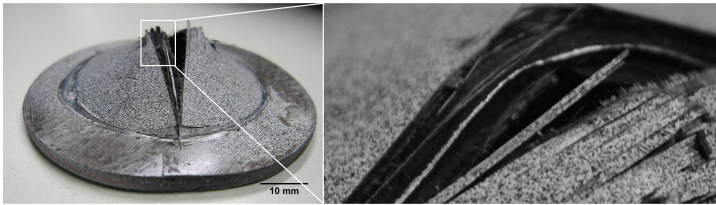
FMEL specimen after the puncture test with an enlarged fracture area
